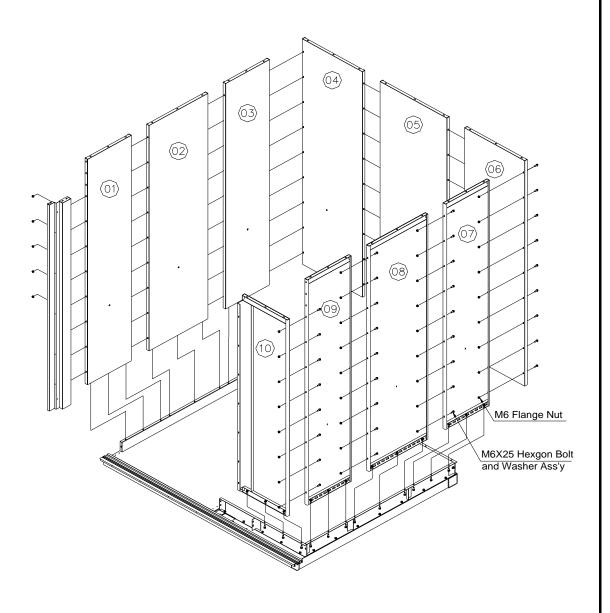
D. CAR PANEL ASSEMBLY
